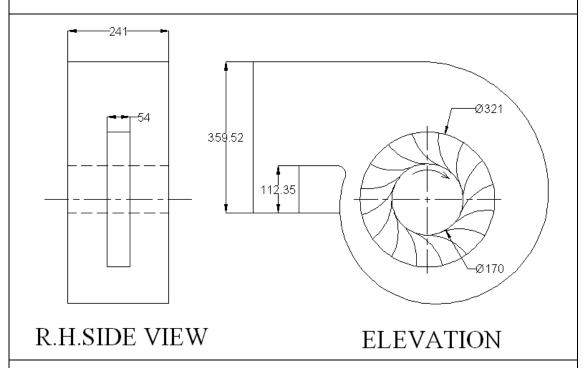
Impeller and Volute Casing Assembly as per Unified Design
